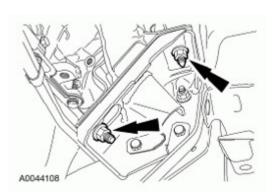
Locating RH Lower Transmission-To-Engine Bolt Courtesy of FORD MOTOR CO.
